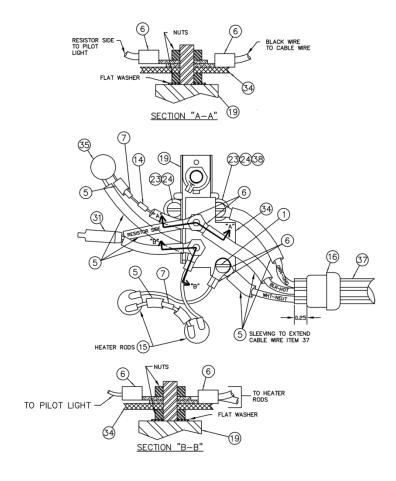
Thermostat Wiring Assembly, 175 ml, 230V
